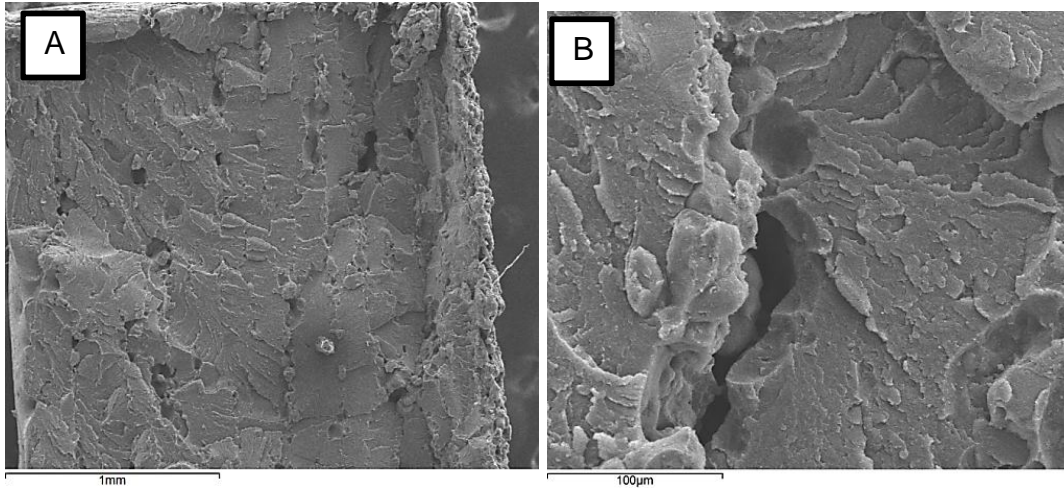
Fracture surface of PEEK ten layer specimen, PS = 9 s, at increasing magnification
